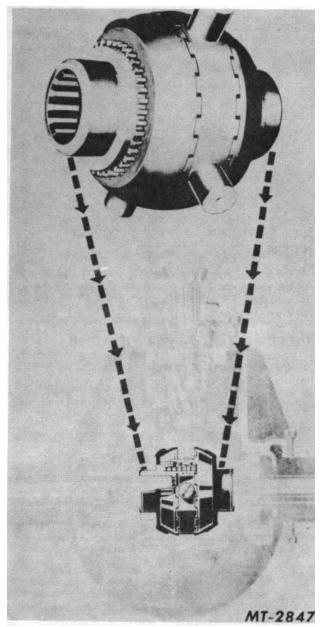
Typical Installation of NoSPIN Unit (Cross Sectional View)
